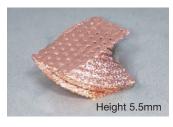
Pure copper laminated molding using a SLM method 3D printer equipped with a blue diode laser.
